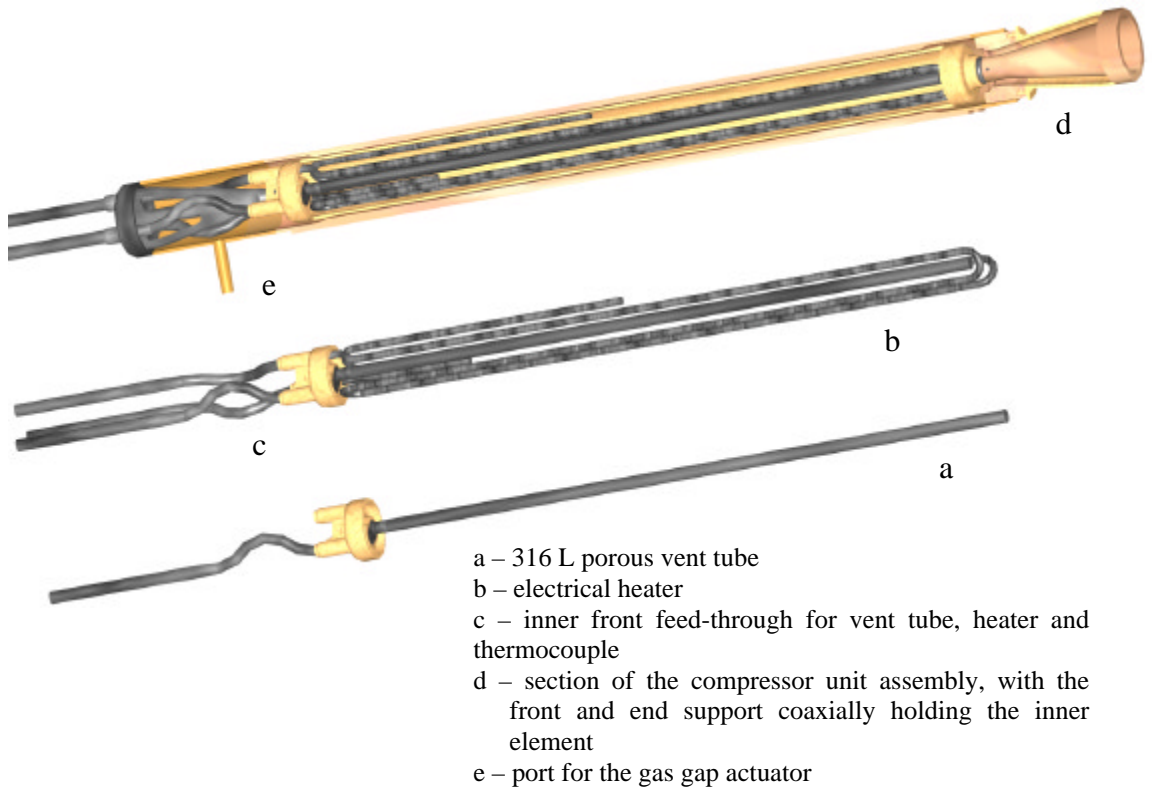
Compressor unit view of the internal parts of a hydride compressor element
